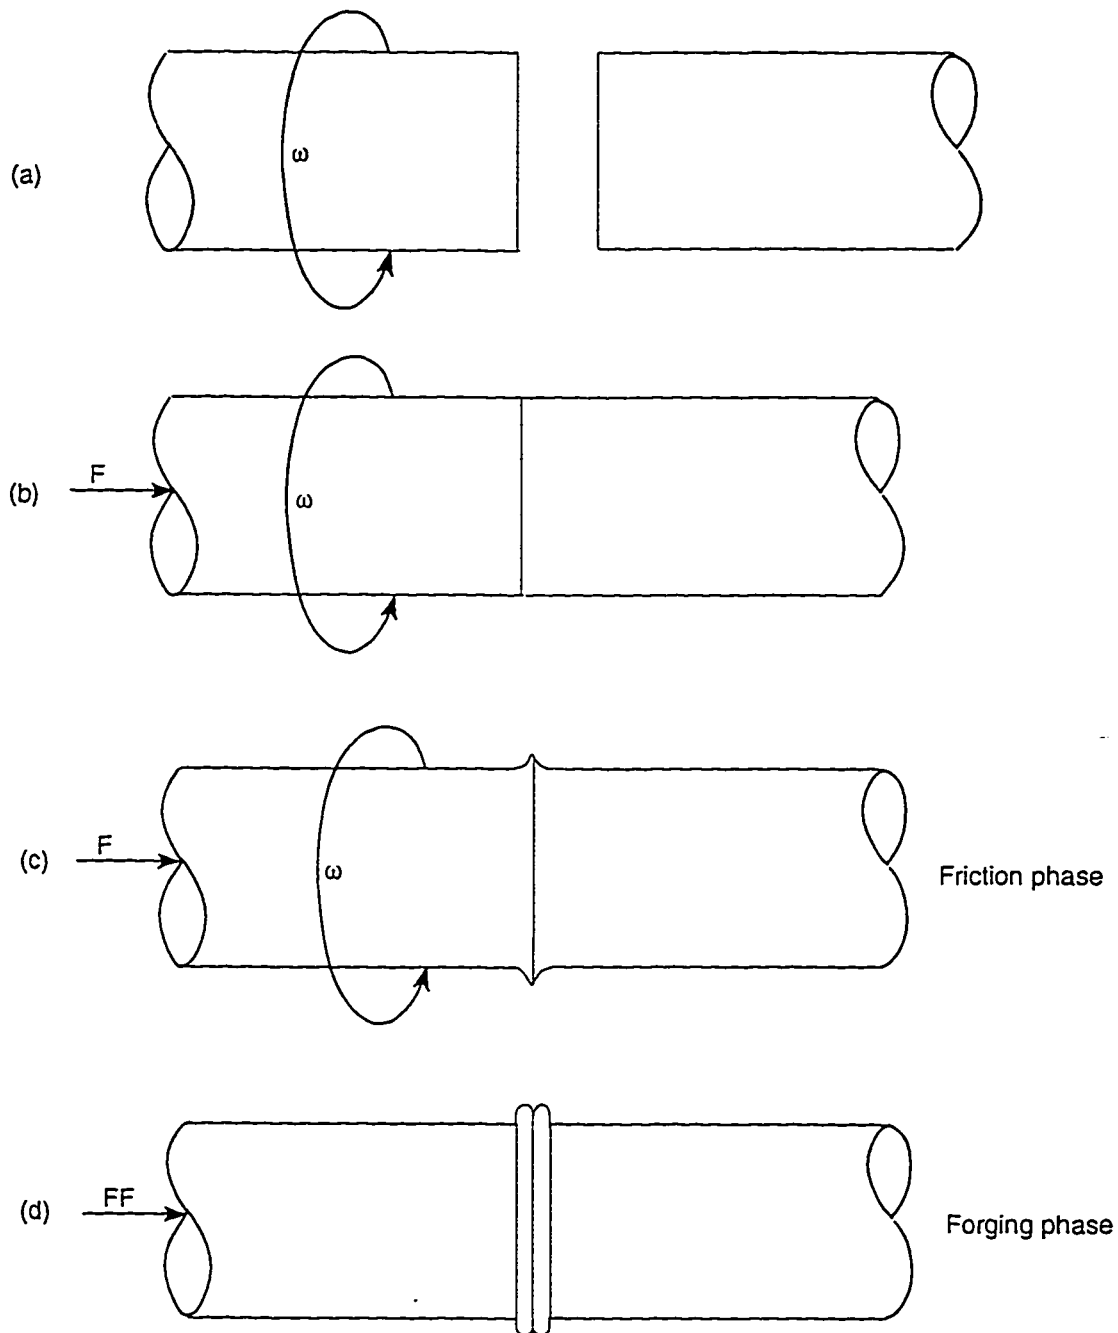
Fundamental Steps in the Friction Welding Process
